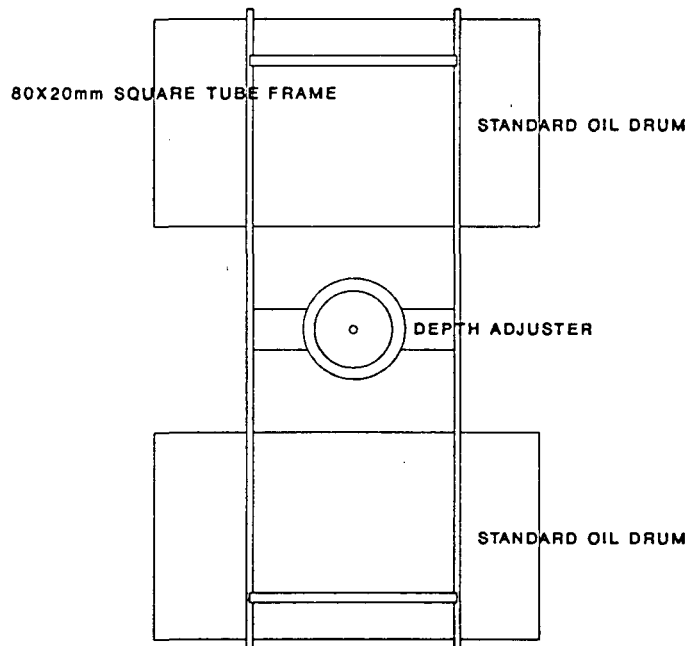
PLAN VIEW OF FRAME AND FLOAT.
